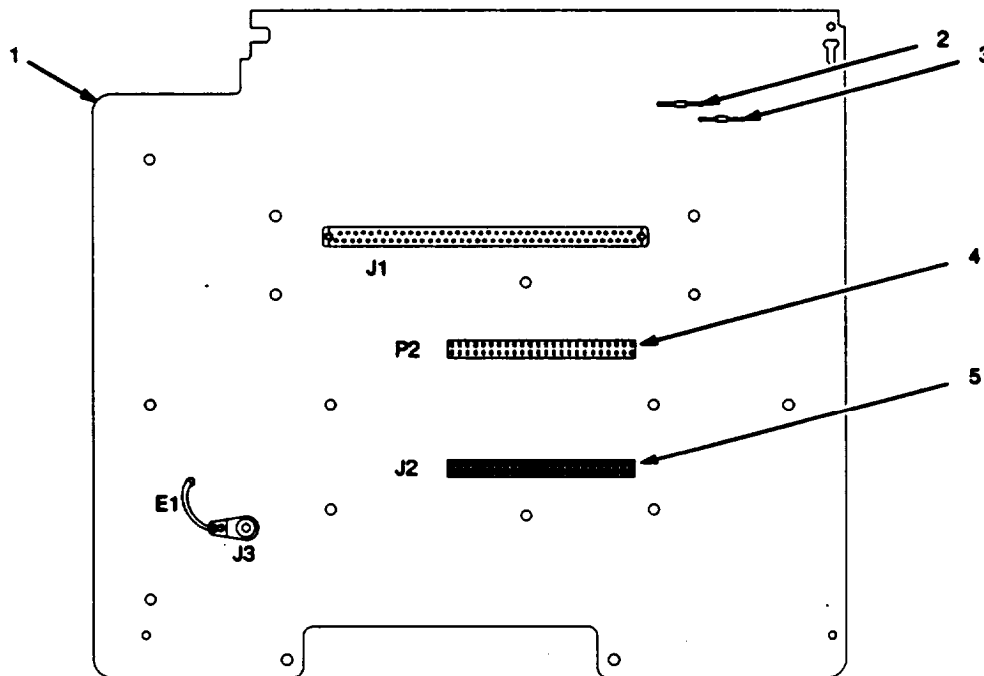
Component Layout of Test Adapter A14 Circuit Card Assembly.
